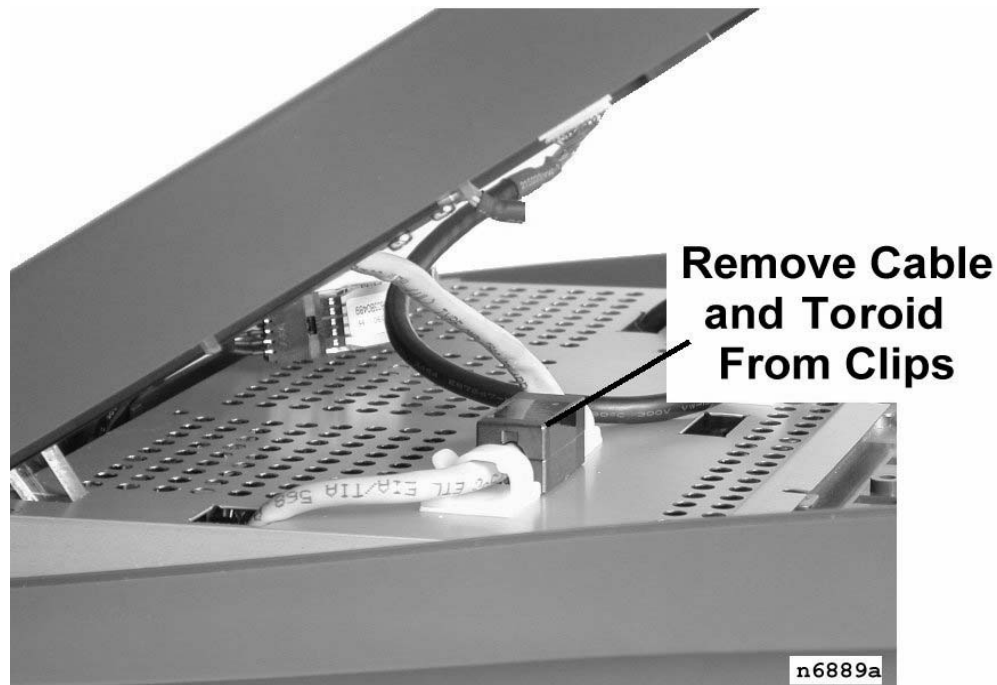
Removing the Mag Stripe Reader Cable Toroid
